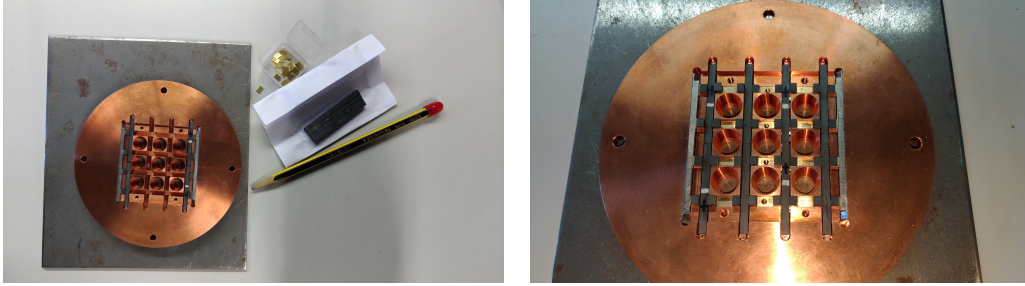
(a) Left: prototype during assembly. (b) Right: assembled prototype.
